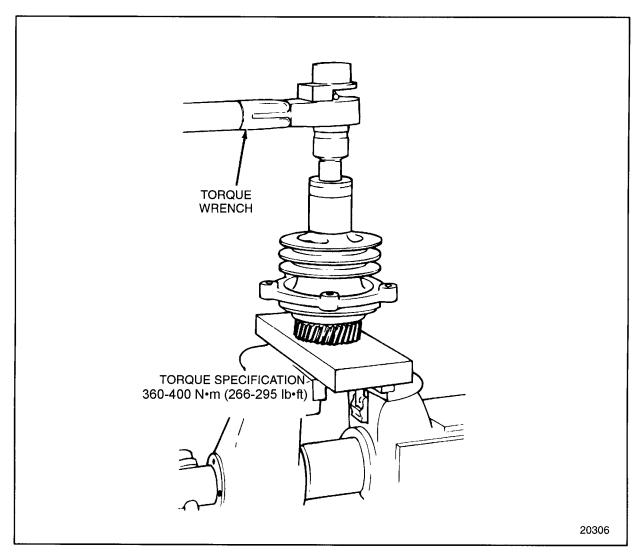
Accessory Drive Pulley Locknut Tightening
